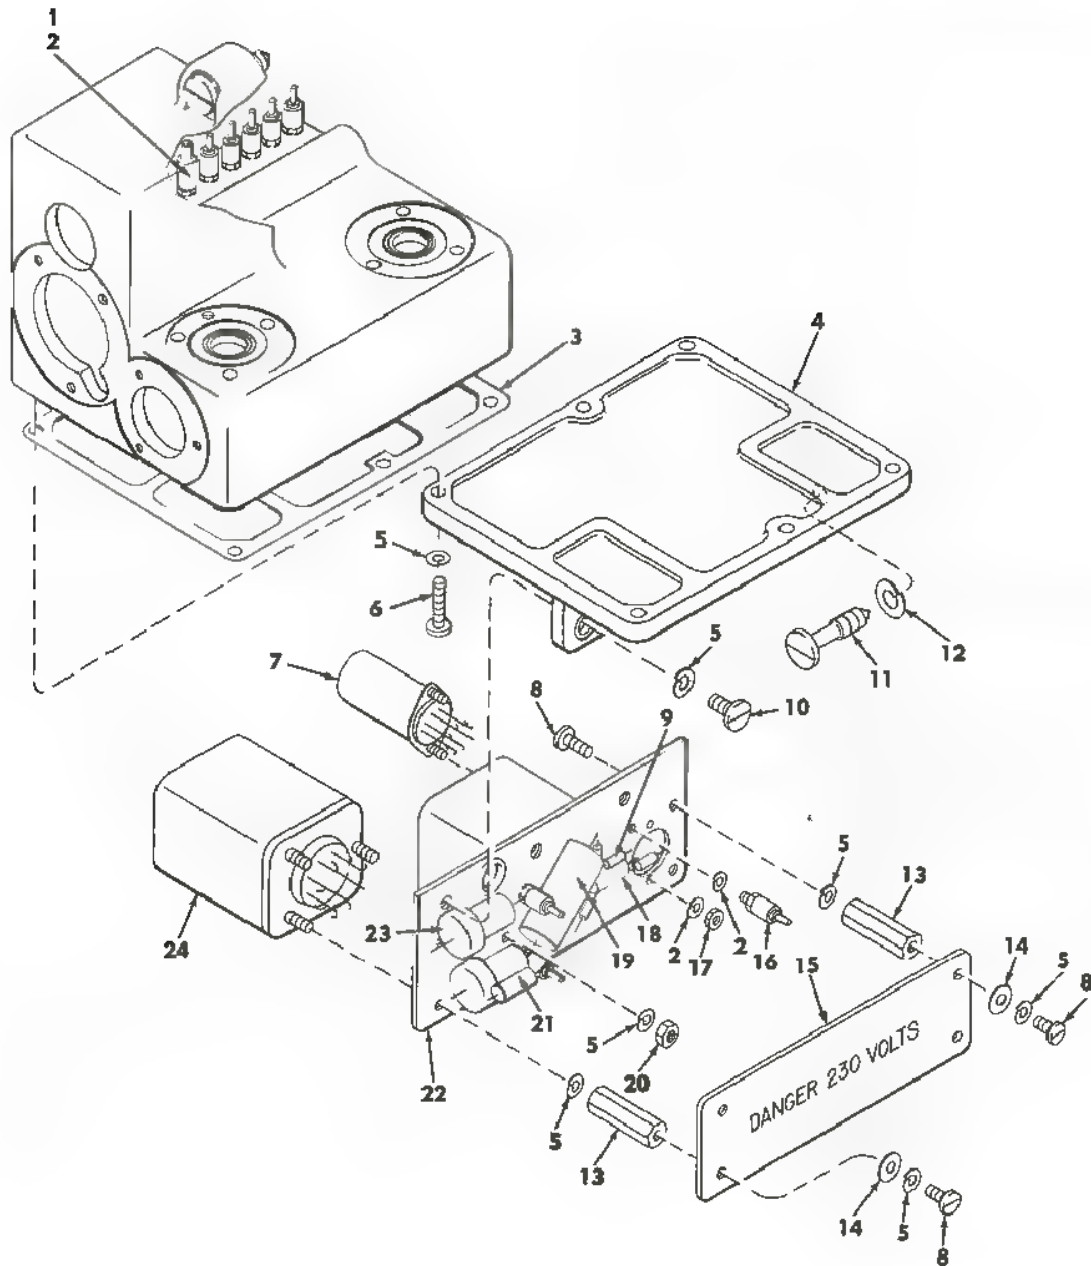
WAVEGUIDE ASSEMBLY /9141892/-PARTIAL EXPLODED VIEW
